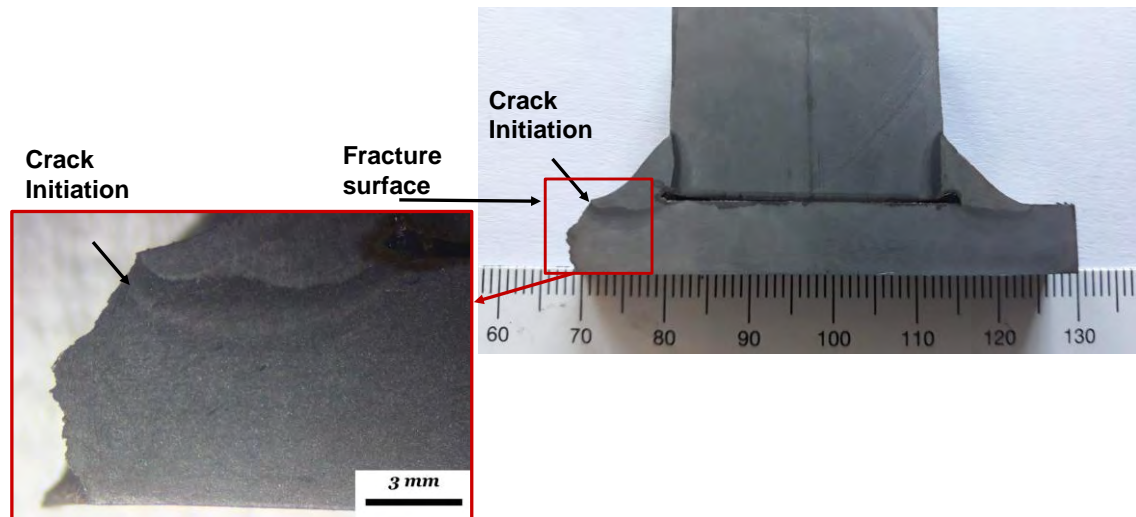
Secondary fatigue cracks in specimen B1 (displacement amplitude  $\Delta u=30$  mm), both in the upper and bottom surface of the base plate.
